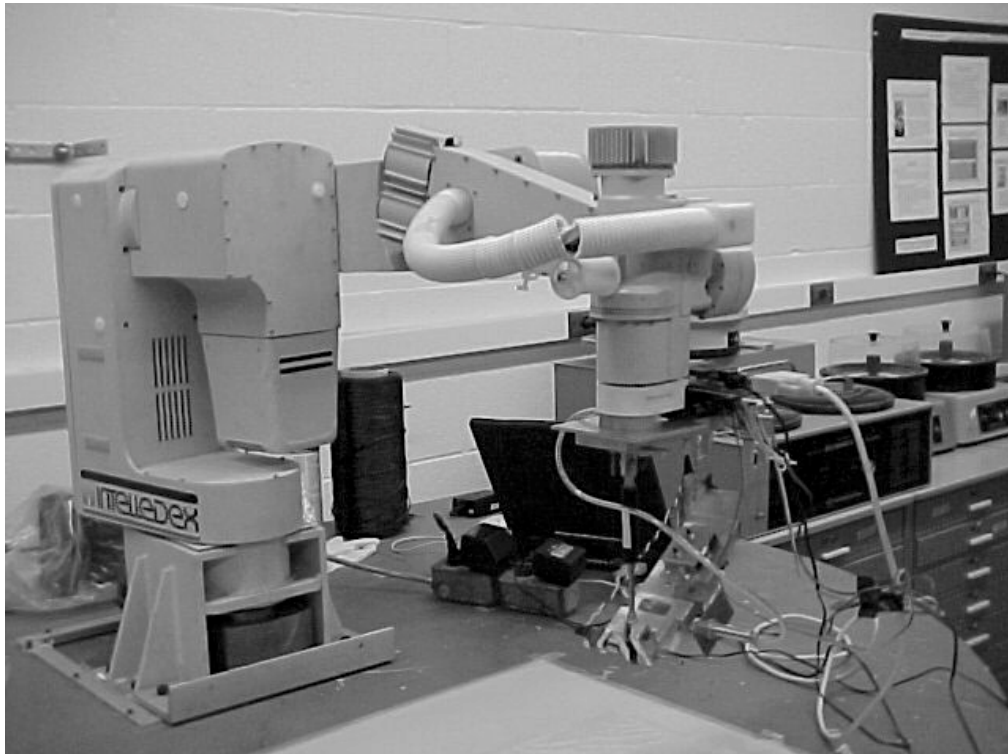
Prototype placement head mounted on KU Intelledex Robot
